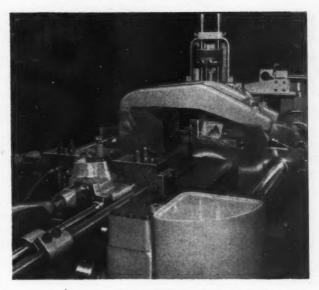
No. 35 U.S. Multi-Slide machine awaiting tooling before being exported to Belgium
